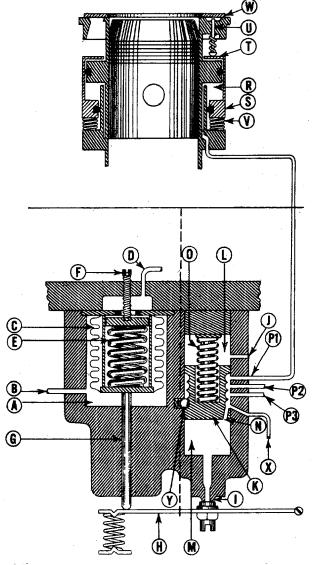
Schematic Drawing of Cylinder Unloading Mechanism (Loaded)
